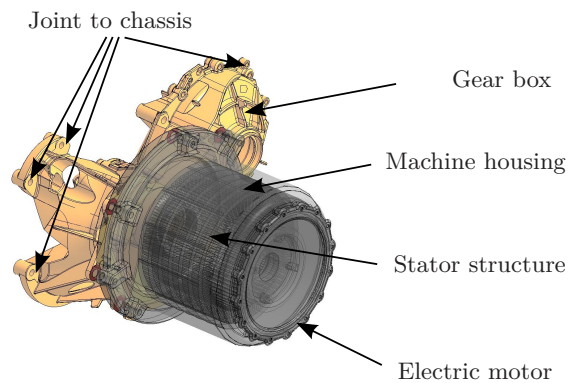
Schematic view of entire electric drive train including electric motor and gear box.
